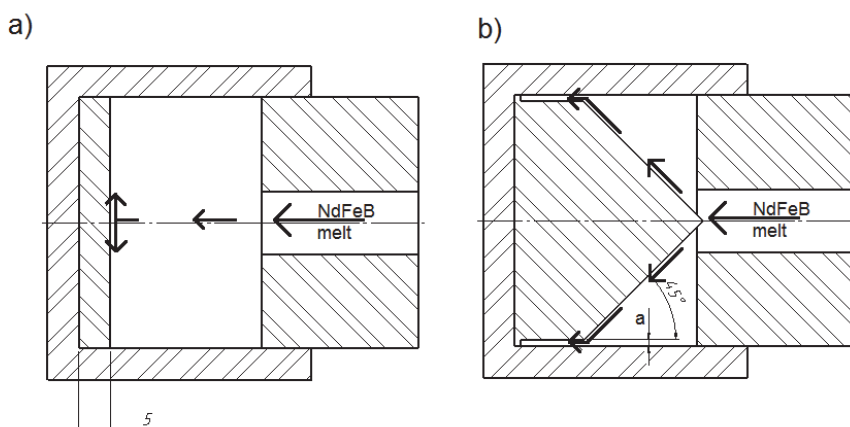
Sketch of the centrifugal cast mold design: (a) initial design; (b) modified design. Melt flow is shown with black arrows [Paper I].
